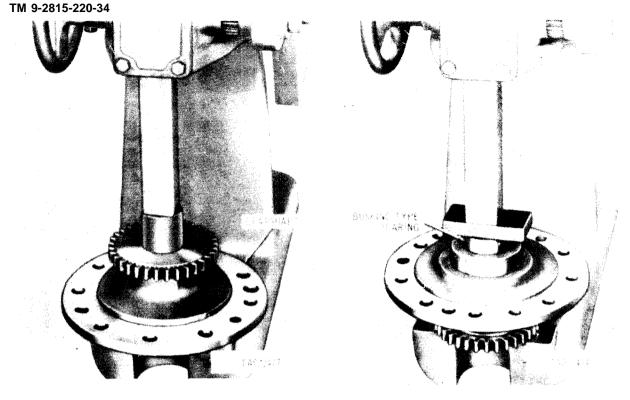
Pressing bushing-type bearing from transmission drive gearshaft, model AVDS-1790-2C and AVDS-1790-2D engines. Figure 3-180. Pressing bushing-type bearing into transmission drive gearshaft, model AVDS-1790-2C and AVDS-1790-2D engines.
